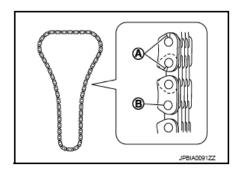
Identifying Cracks And Wear Of Link Plates And Roller Links Of Timing Chain Courtesy of NISSAN MOTOR CO., U.S.A.
